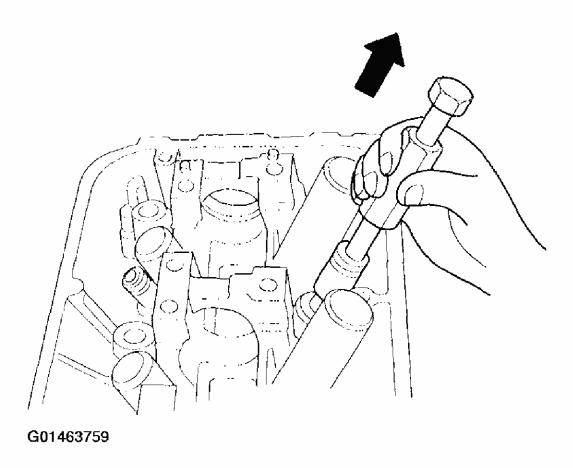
Removing The Valve Seal Courtesy of AMERICAN HONDA MOTOR CO., INC.
